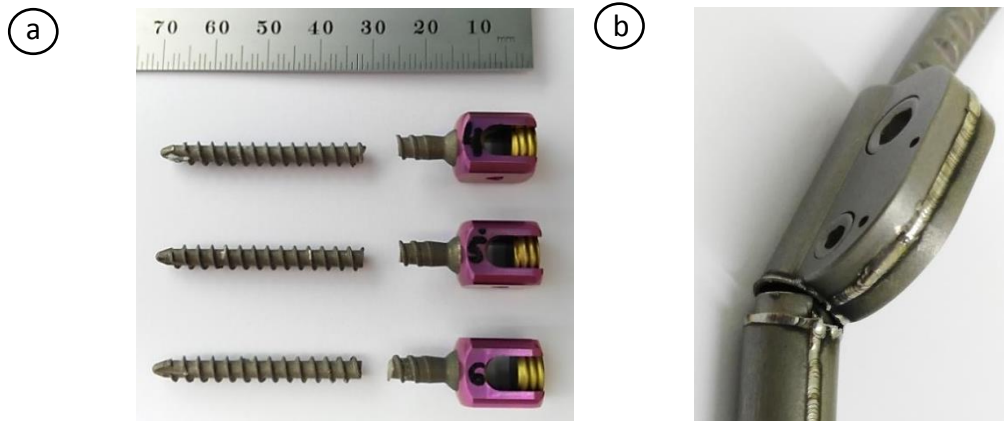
Screw and welding fractures produced after fatigue testing. a) Fracture of three pedicle screws during fatigue tests 4, 5 and 6. b) Fracture of the device welding line after fatigue test 4.
